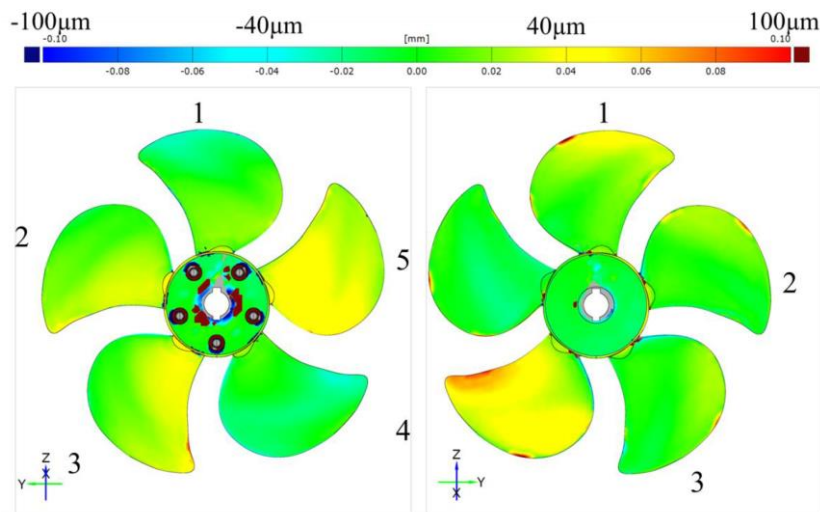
Deviation of the manufactured geometry from CAD model, Potsdam Propeller Test Case [1].
